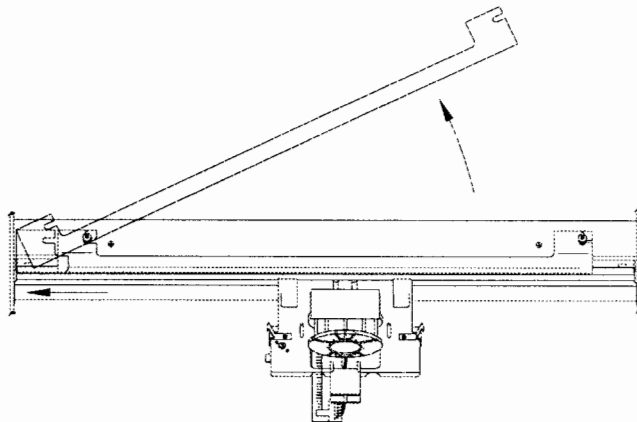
Tear Bar Removal on a Demand Document Printer
